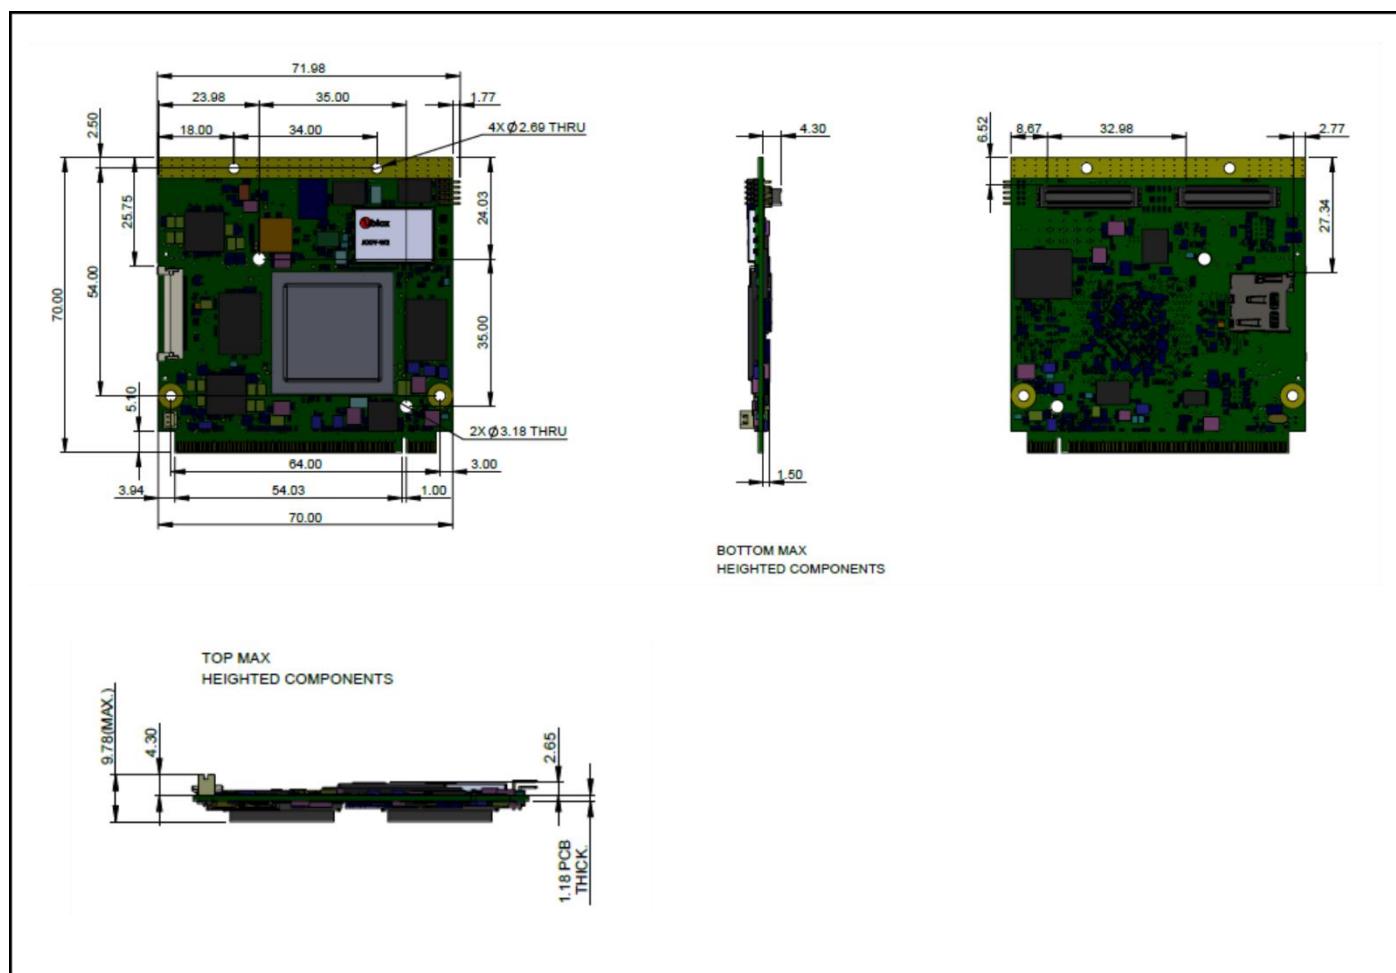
Mechanical dimension of i.MX 8 QM/QP Qseven SOM
